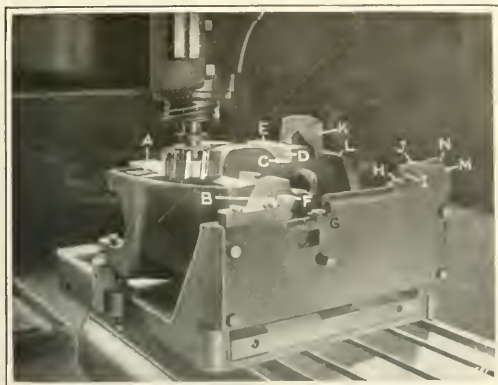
Work set up on Milling Machine for roughing out Saddle Bearing
